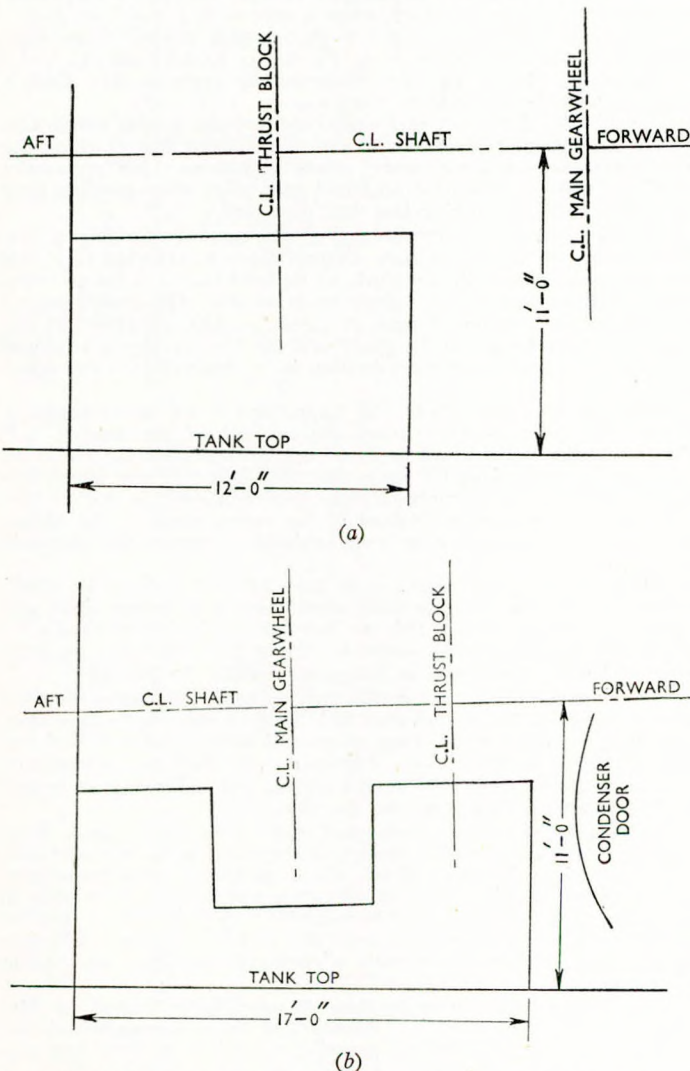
Side elevations of (a) separate thrust block seat and (b) seating under locked train gearcase.
